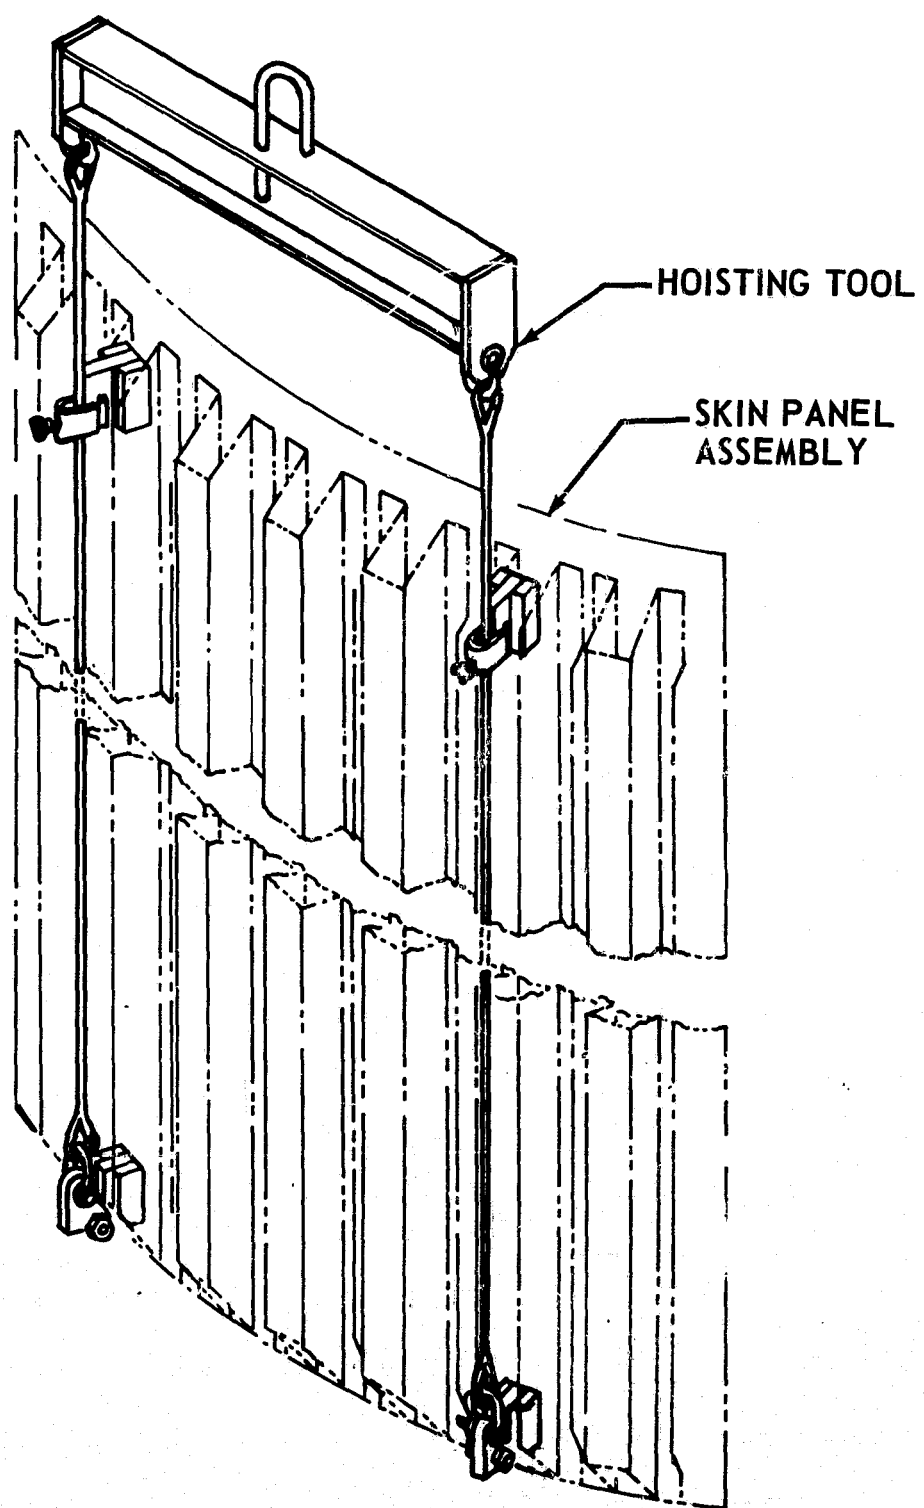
SKIN PANEL SUBASSEMBLY HOISTING TOOL
